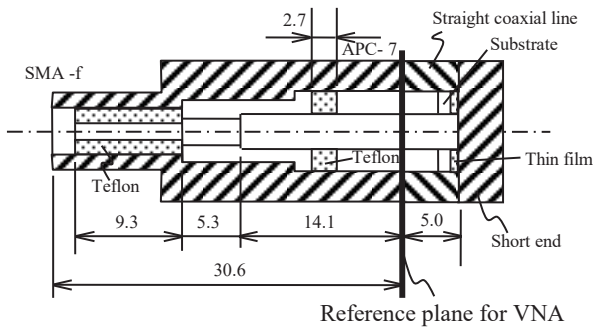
Cross section of the short-circuited coaxial fixture loading a toroidal shaped thin film sample.
